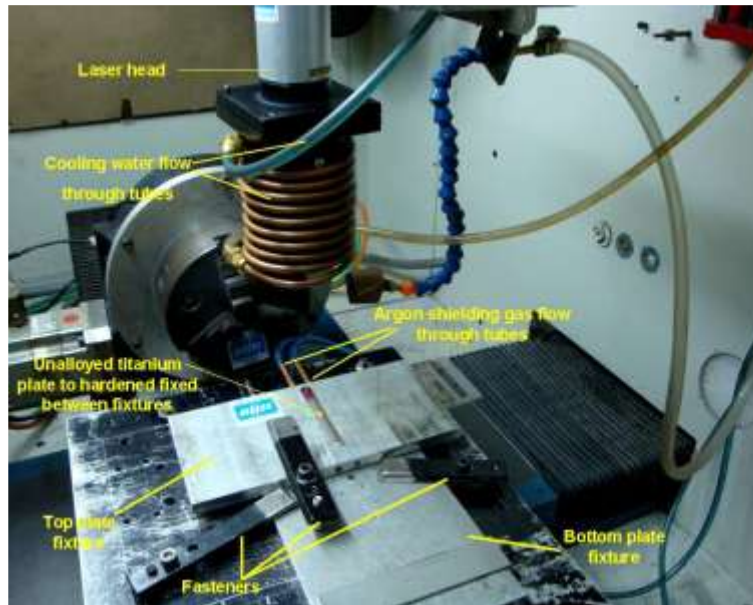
Experimental set-up showing the laser beam head and shielding gas arrangements in the working chamber [18].
